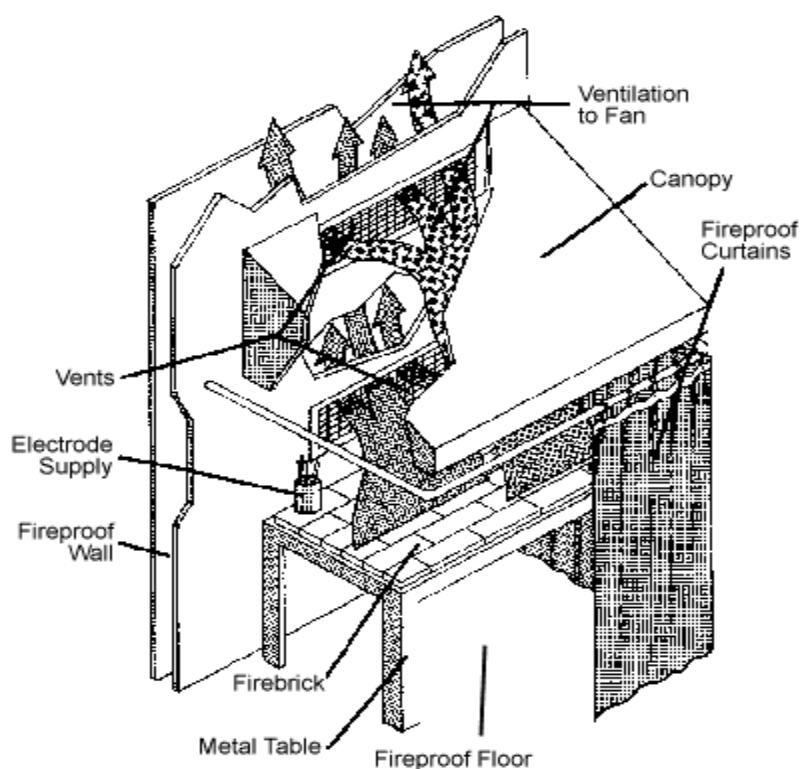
Typical welding area showing proper ventilation and screening
